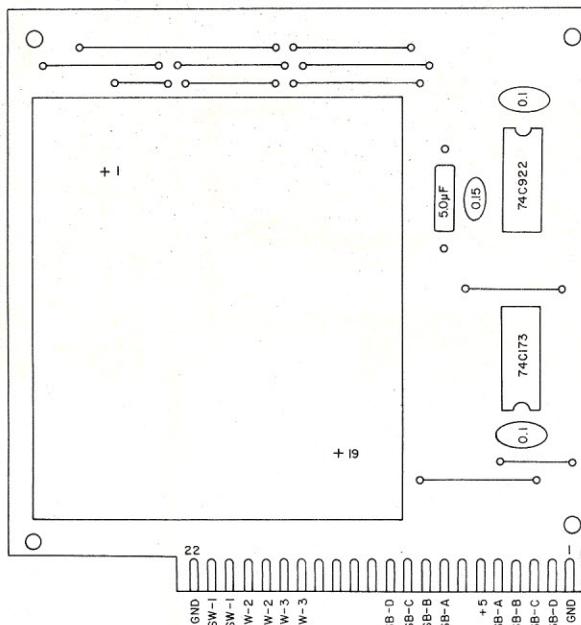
Parts layout for the circuit board pattern shown in Fig. 2.
